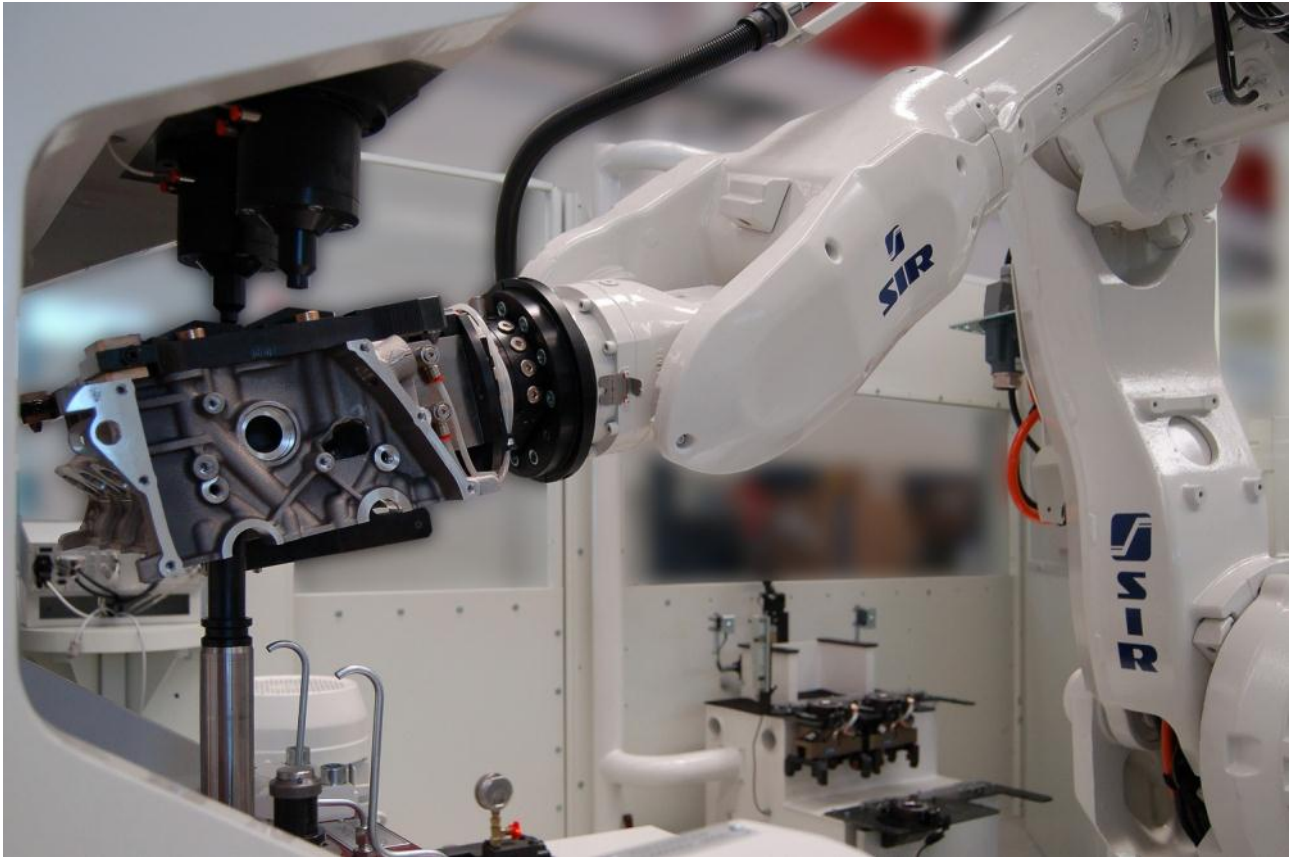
Detail of the automated assembly process of valve seats and guides for high performance engines (Courtesy: SIR Spa – MO, Italy).
